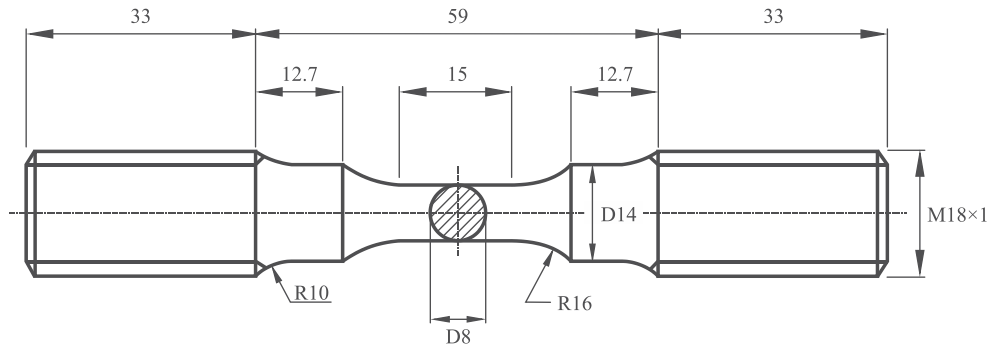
Geometry of specimens for low-cycle fatigue tests (dimensions in mm).
